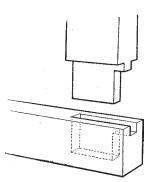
COMPLETED JOINT SHOWING HAUNCH
